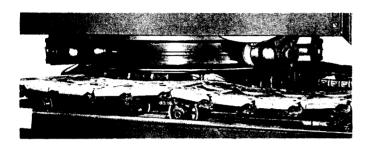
Conical Hook Rollers running in Double-flanged Roller Path.
